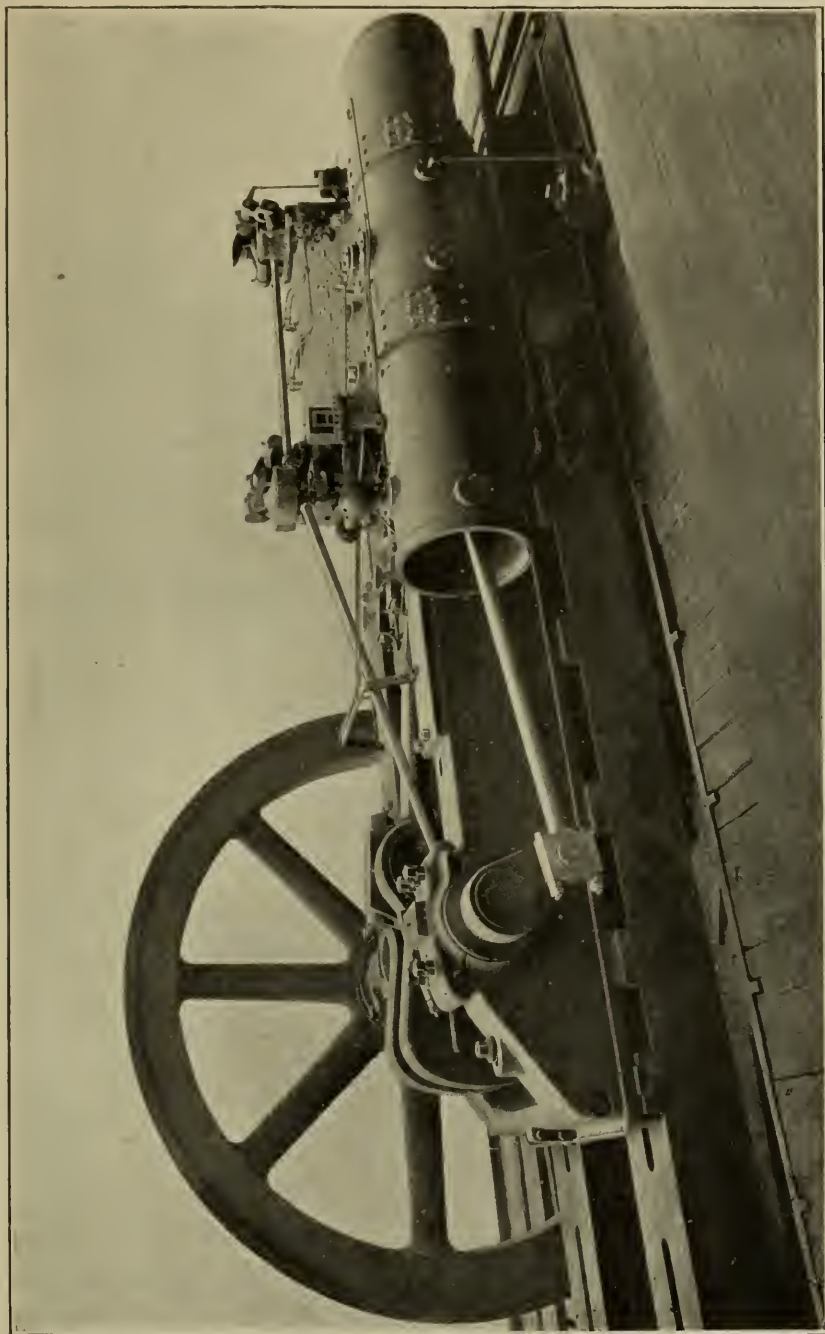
300 B.H.P. Koerting Gas Engine (Mather and Platt). Note inlet valves operated by eccentric on main shaft.
